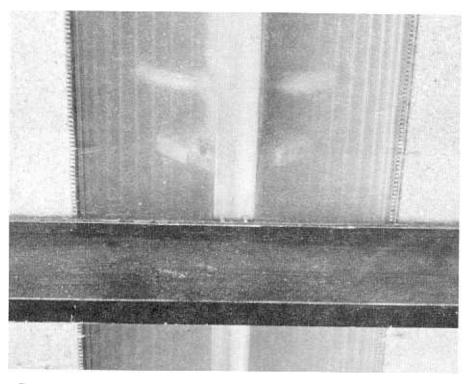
General view of jet tool nozzles and lower end assembly inside well screen. P801-D-80971
